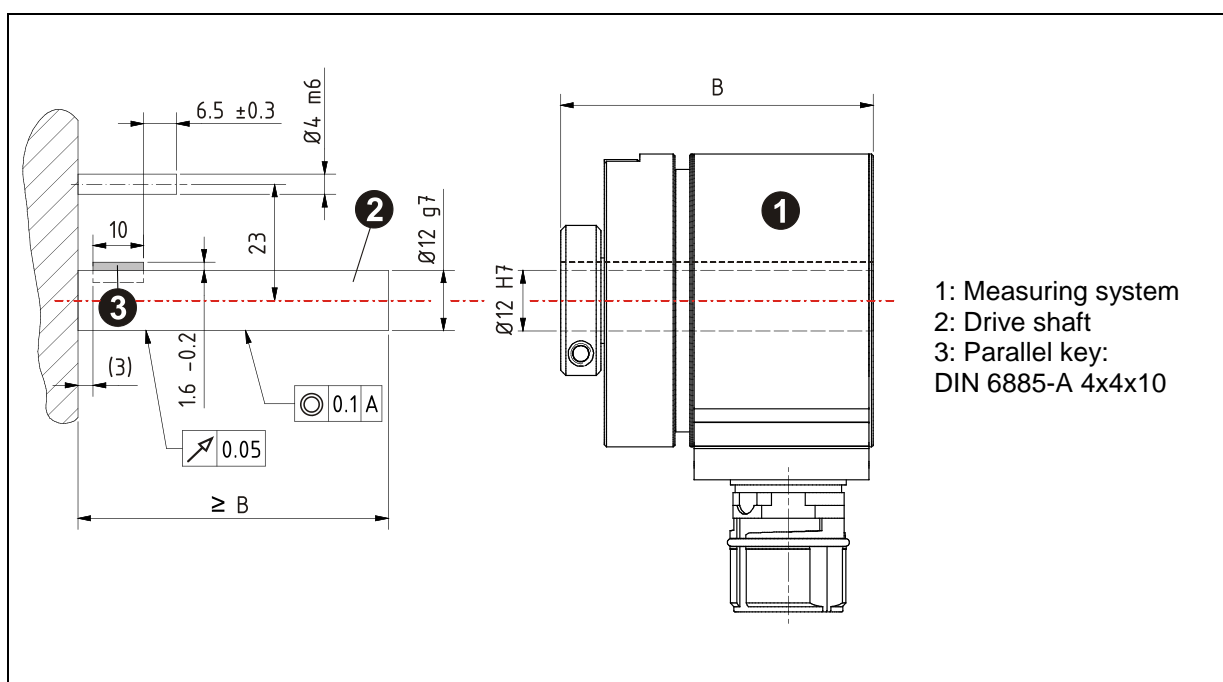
Requirements for the shaft mounting, example with shaft  $\varnothing 12 \text{ H7}$
